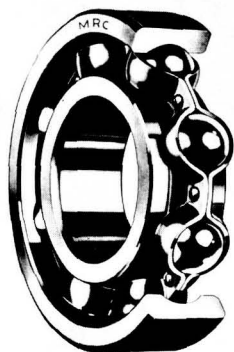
Deep-groove ball bearing. (Courtesy Marlin Rockwell Corporation.)
